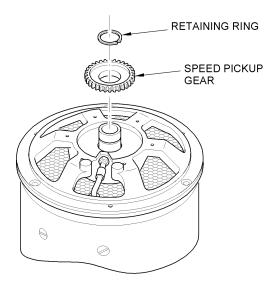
Installing Speed Pickup Gear and Retaining Ring onto Armature Shaft (Non-Preload)
